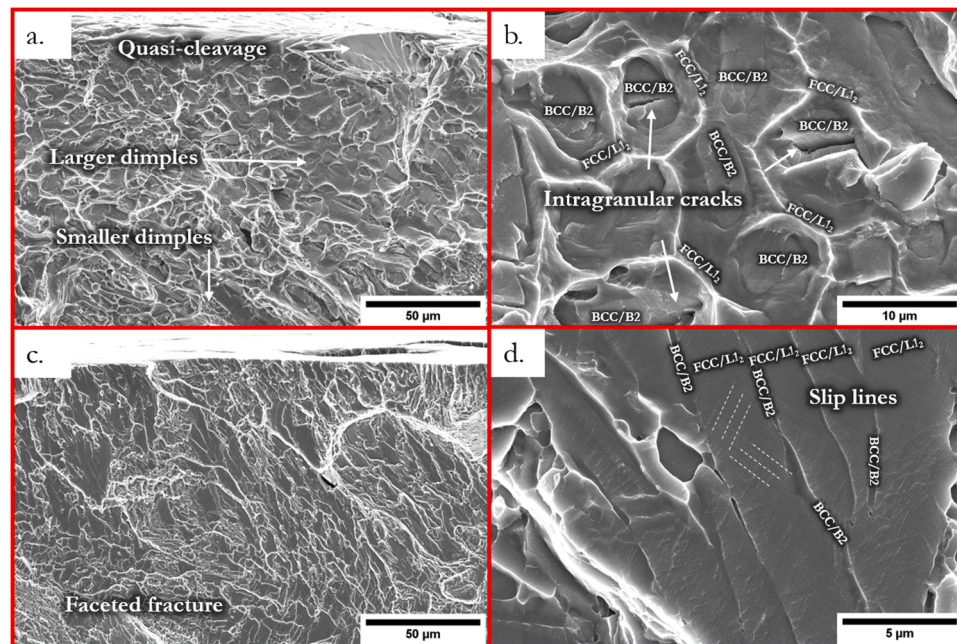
Detailed fractographs of the tested specimens (H-charged): a&b. as-cast; c&d. AM.
